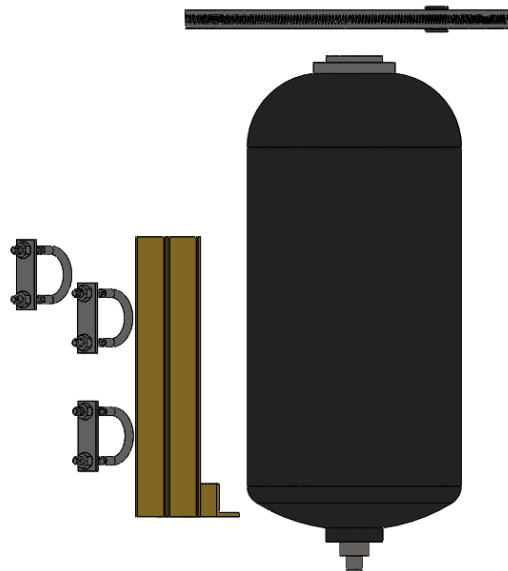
Exploded View of Accumulator Mount Subassembly
